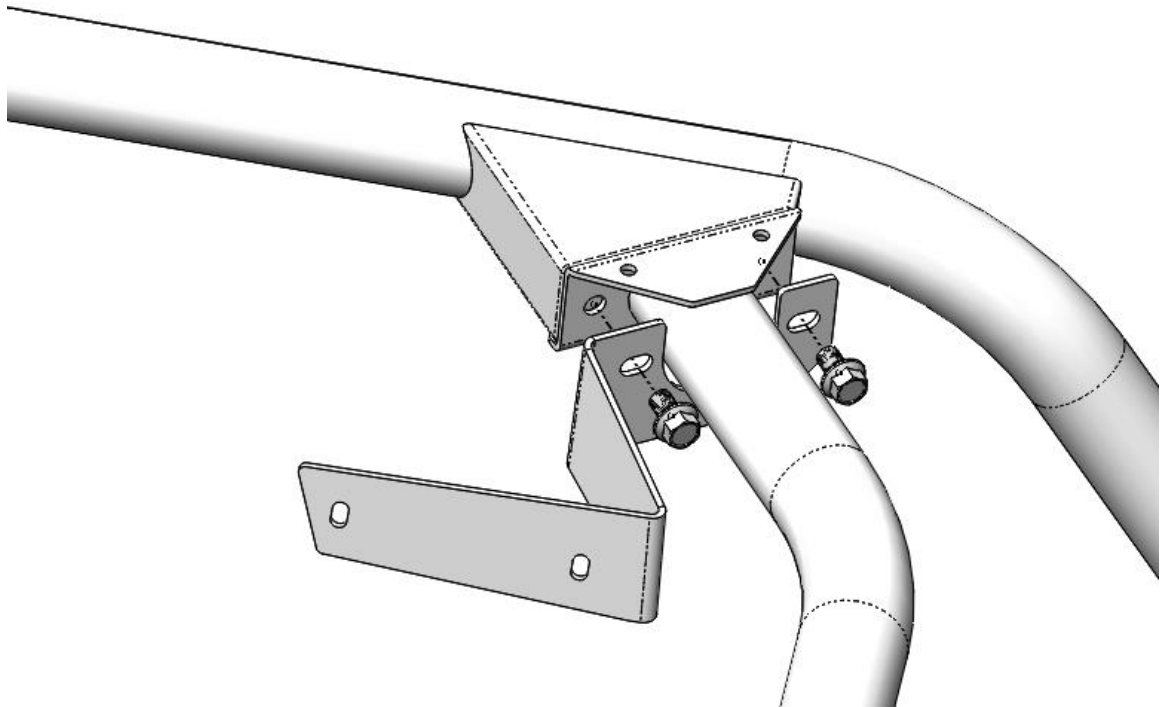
Mounting location of *Audio Mini* bracket. (Left side shown, right side similar)
